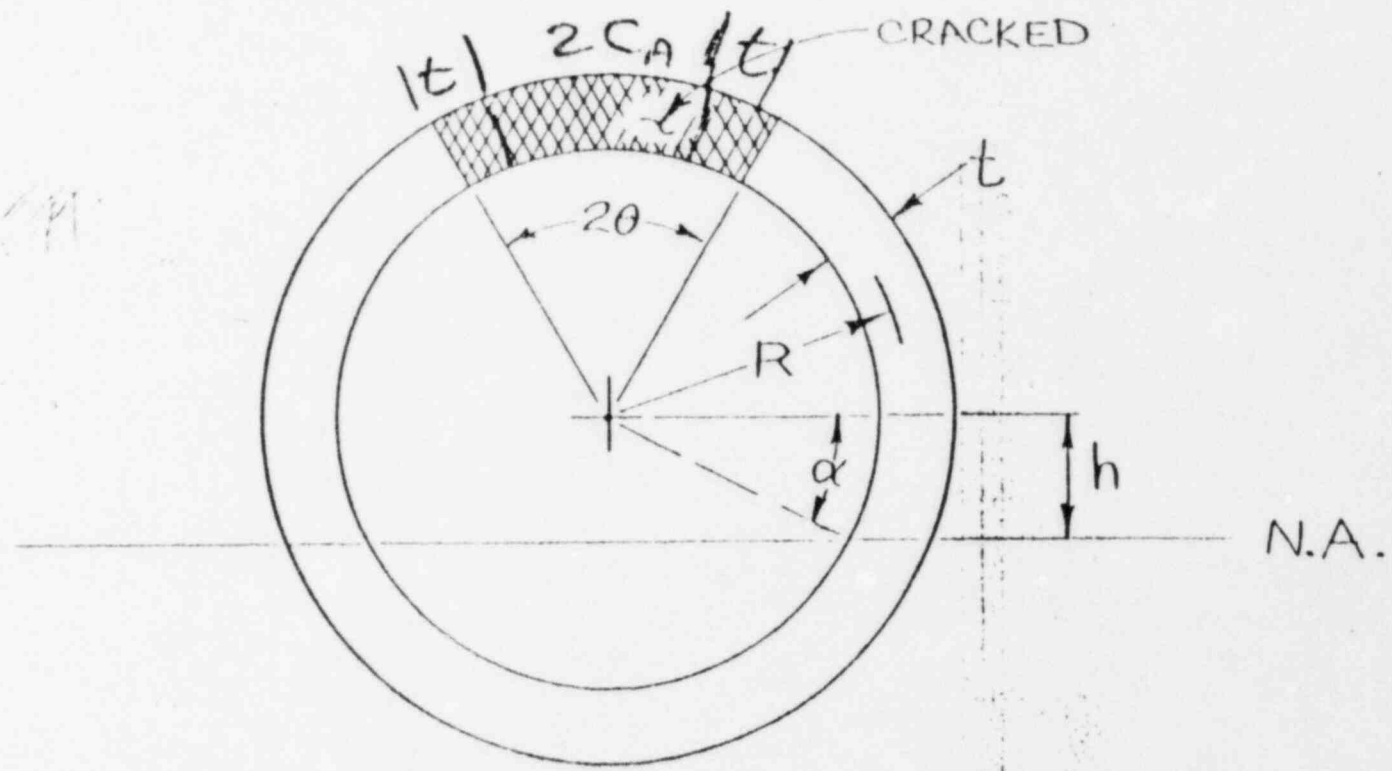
Geometry of Cracked Cross-section of Pipe
